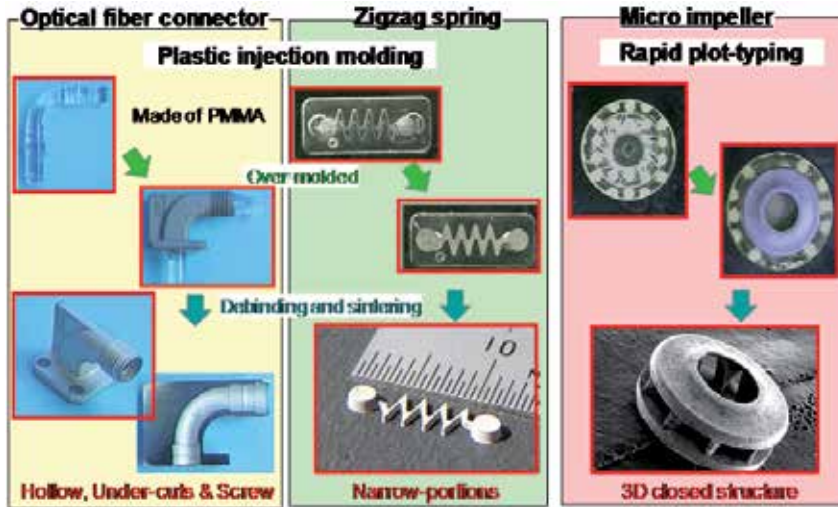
Examples of metal parts manufactured by SPiMIM process.
